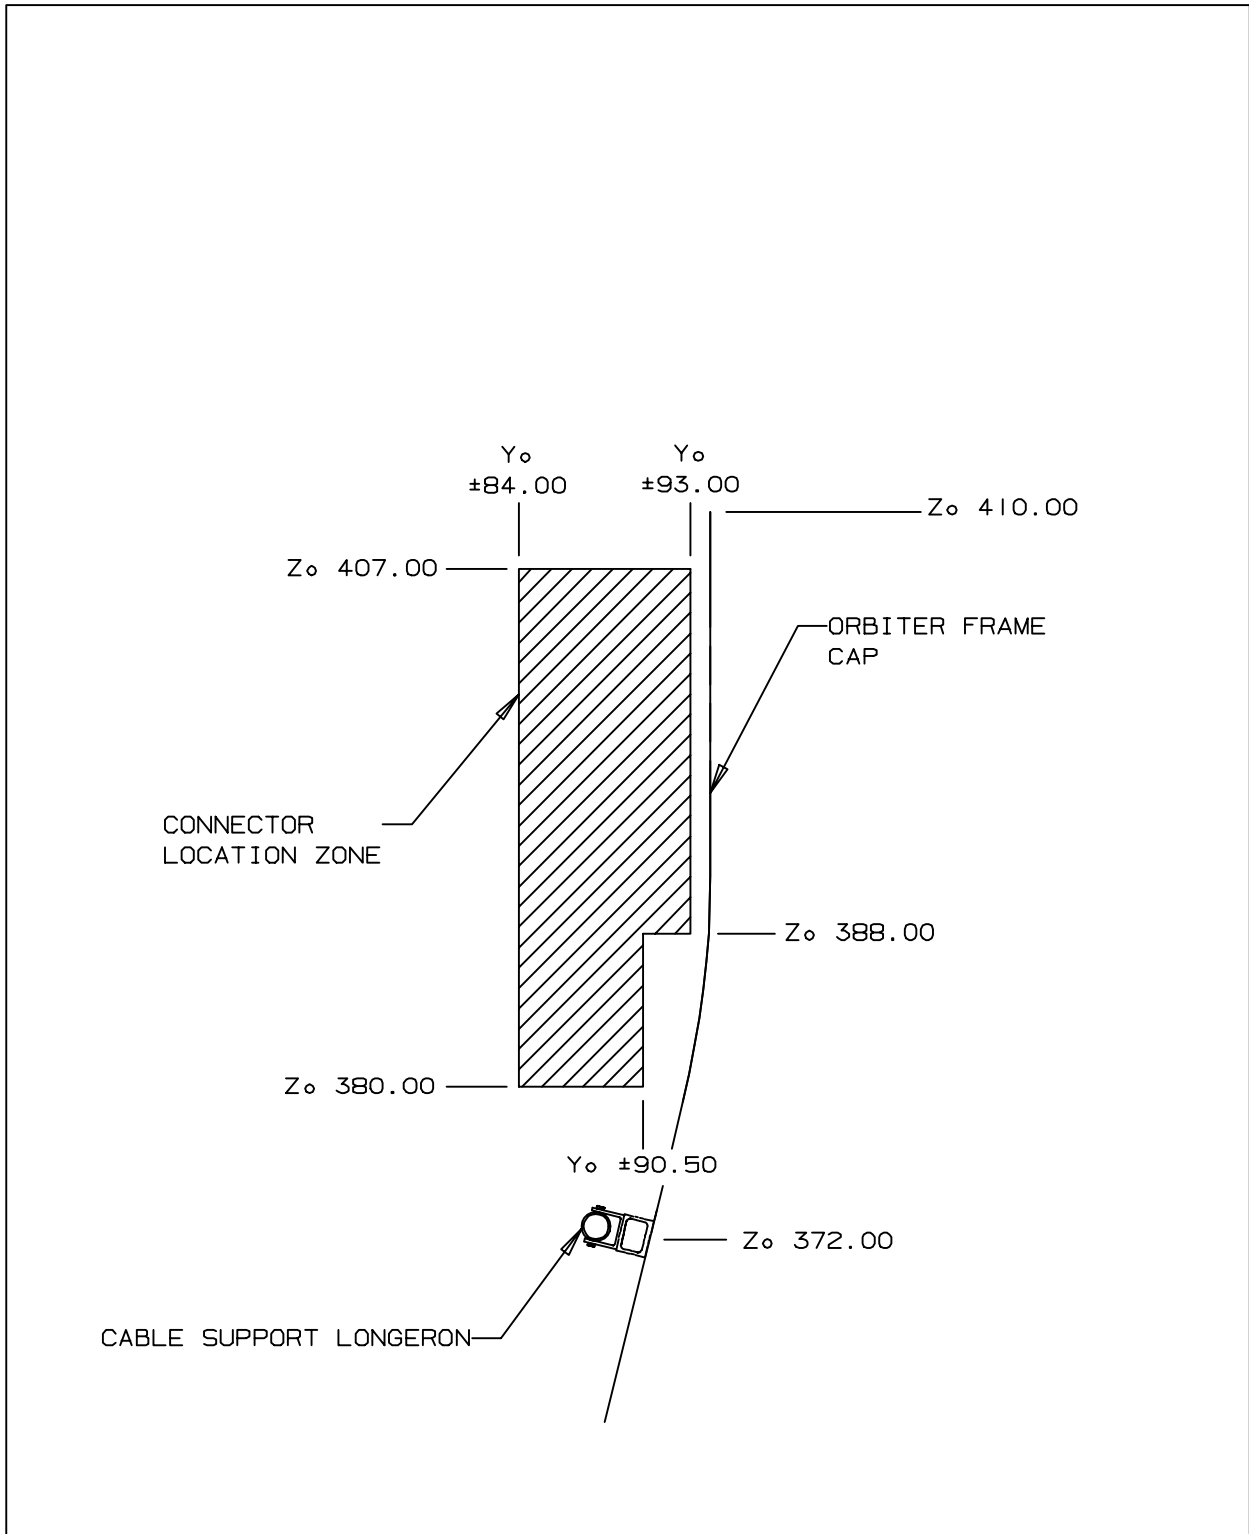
PAYLOAD CONNECTOR LOCATION AND CABLE CLAMPING
